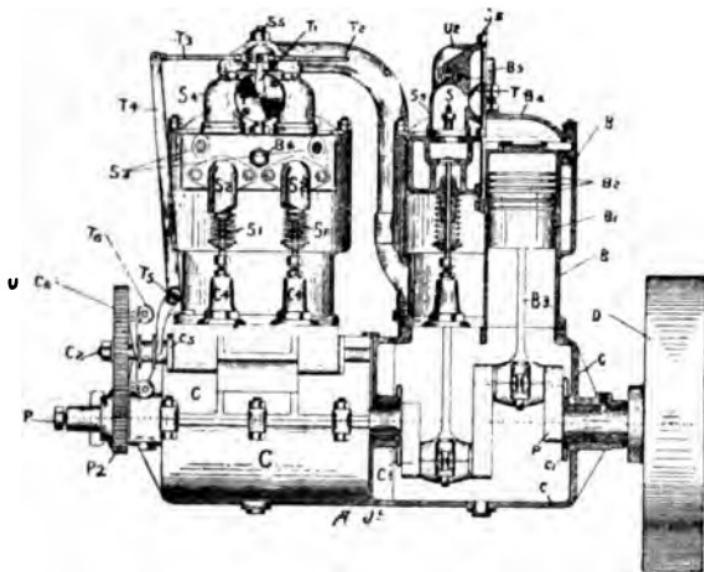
SIDE ELEVATION AND SECTIONS OF 12-H.P. DAIMLER MOTOR
